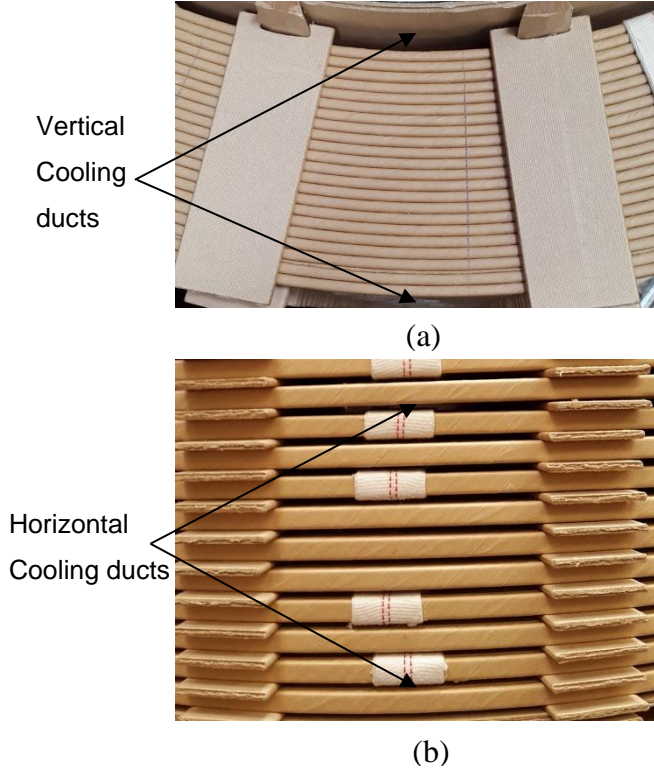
Disc-type winding geometry: (a) top view, (b) front view
